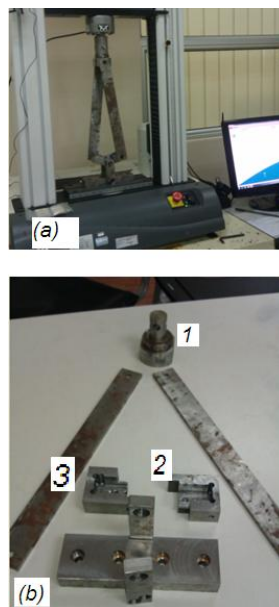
(a) The tool attached to the tensile machine (b) components of the tool: slider (1), cranks/holders (2) and connecting rod (3)
